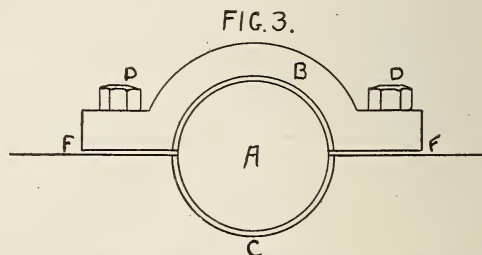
Nuts D should be screwed down with fingers, and no tighter, while taking readings. Shims should be placed at points F after a perfect bearing has been secured.
